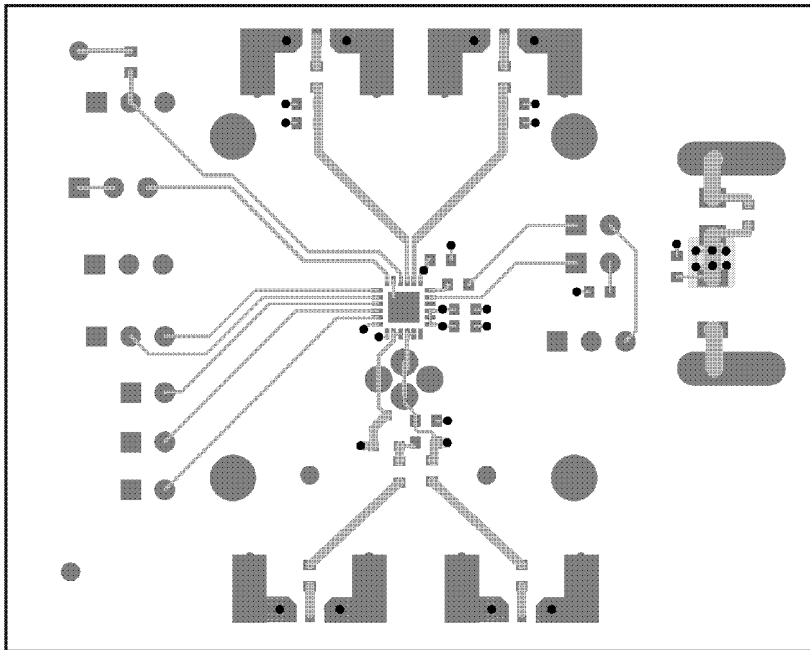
MAX3967A EV Kit PC Board Layout - Component Side
